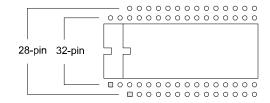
Using 28-pin Devices in a 32-pin Socket
